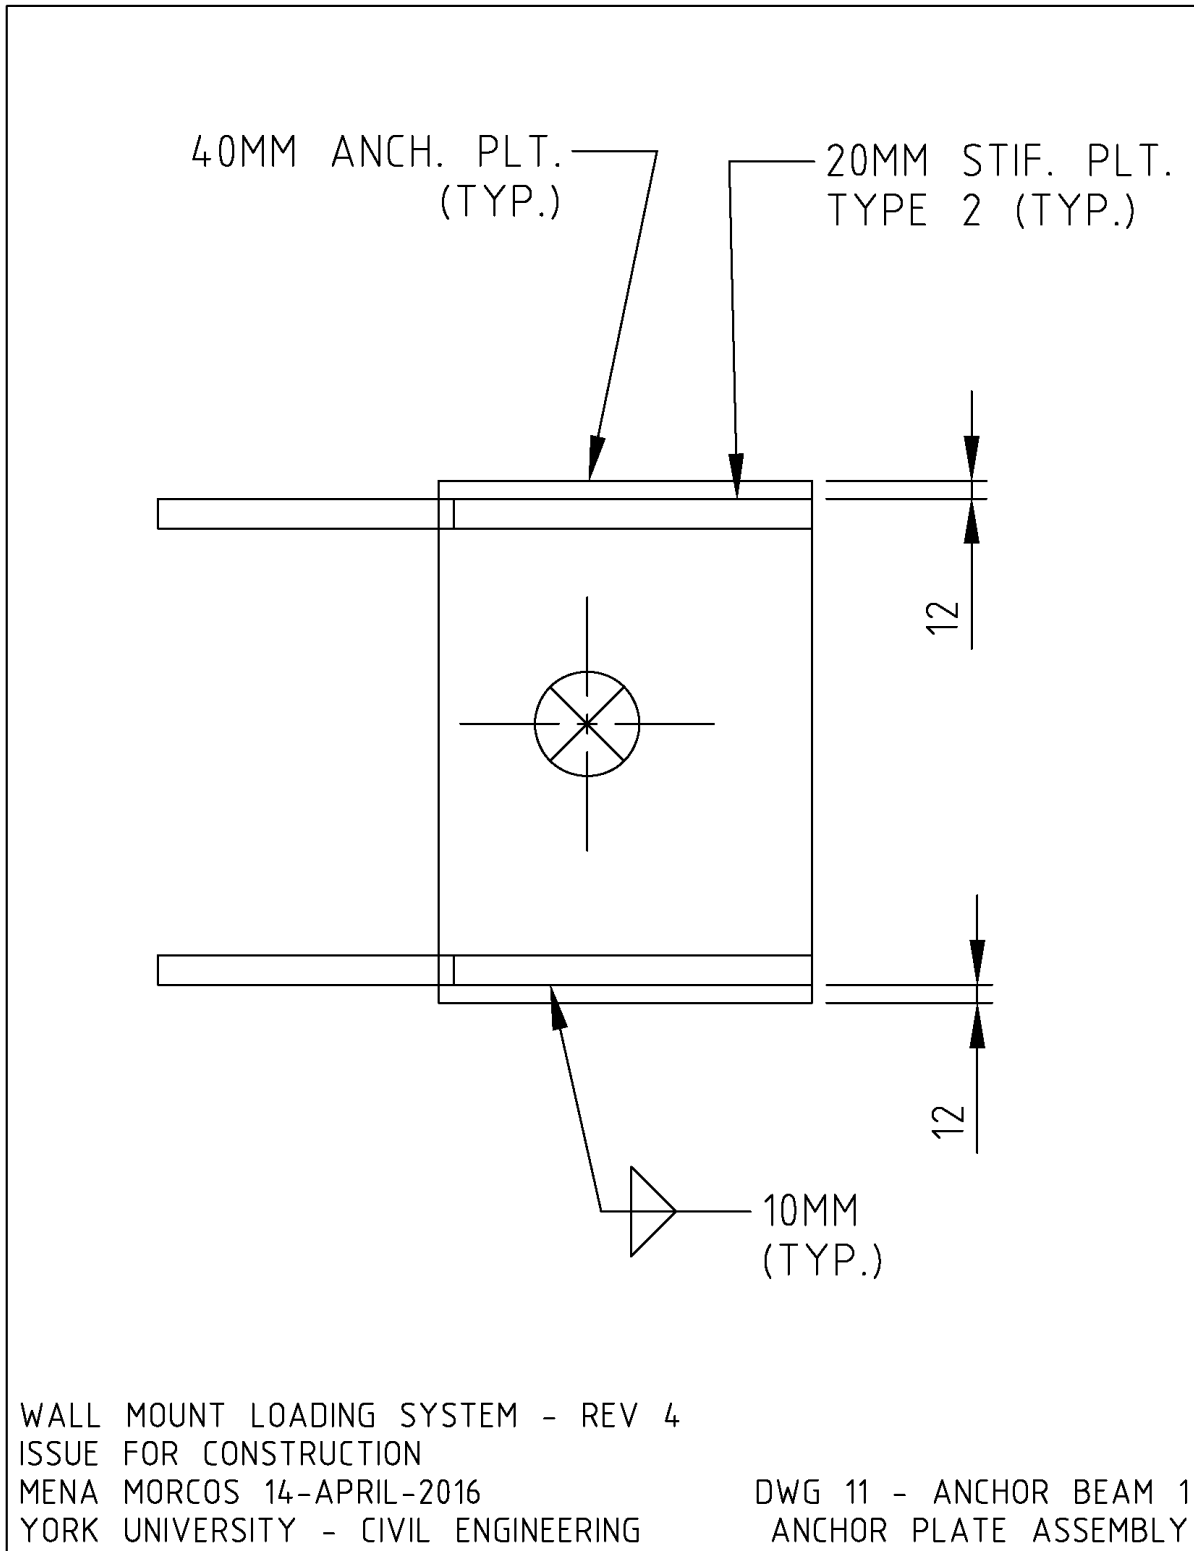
Wall mount loading system design and fabrication drawing – Drawing 11.
